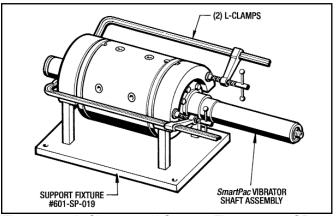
L-Clamps and Support Fixture #601-SP-019
